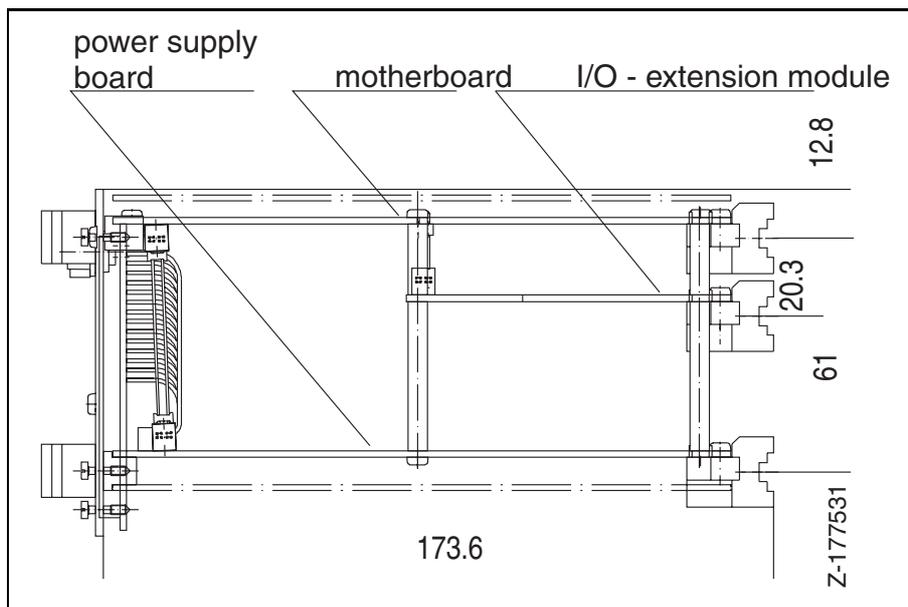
Dimensional drawing of 19" plug-in card (dimensions in mm)
